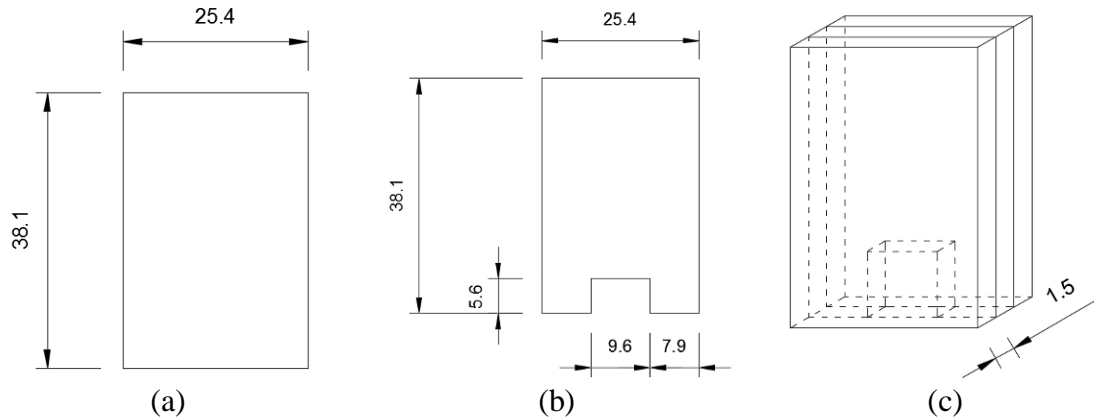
Fiberglass Tab Layup Geometry (a) Outer Layers (b) Center Layer (c) Overall Layup (Dimensions in mm)
